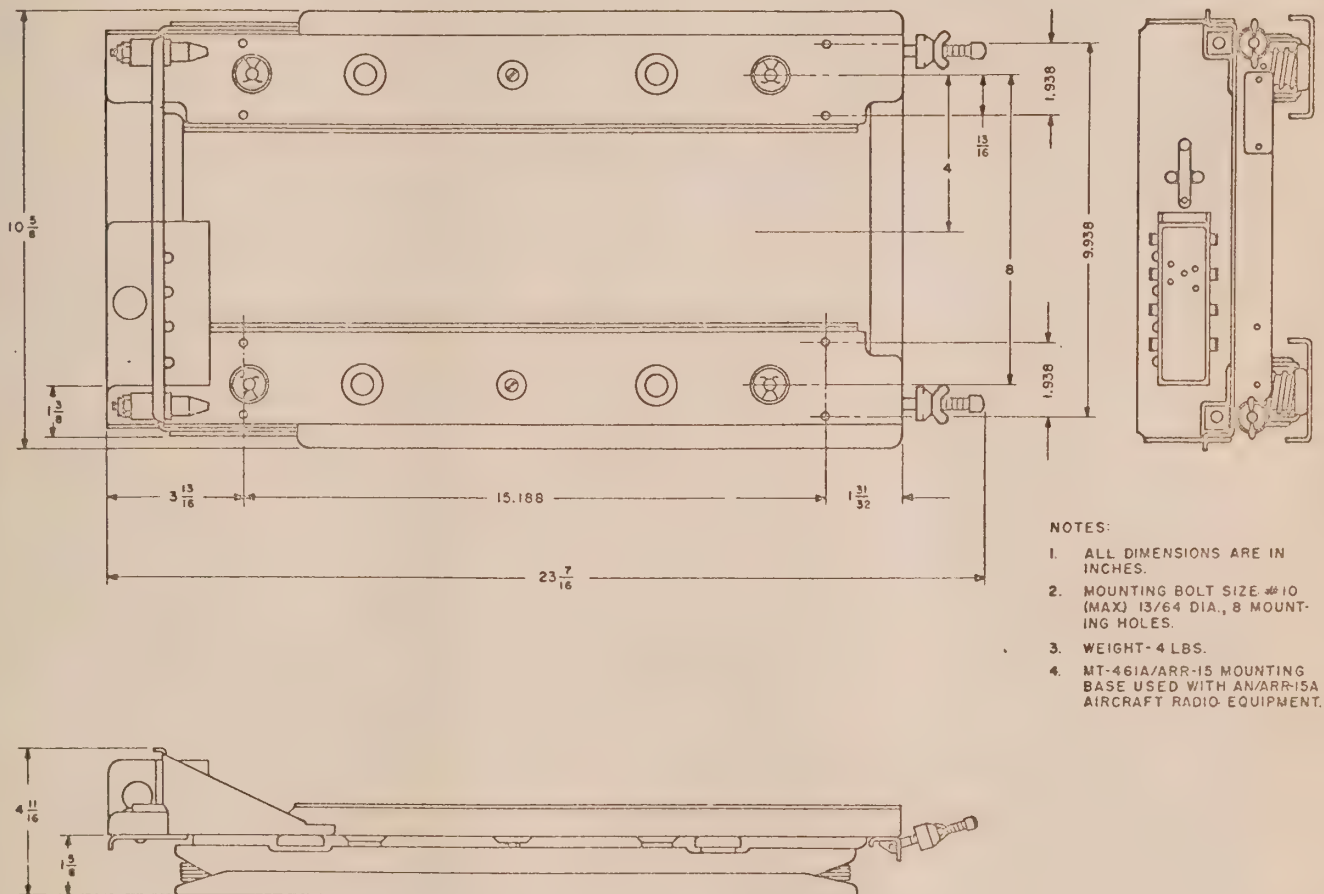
A. Mounting Base Dimensions, Radio Set Control C-733A/ARR-15A
